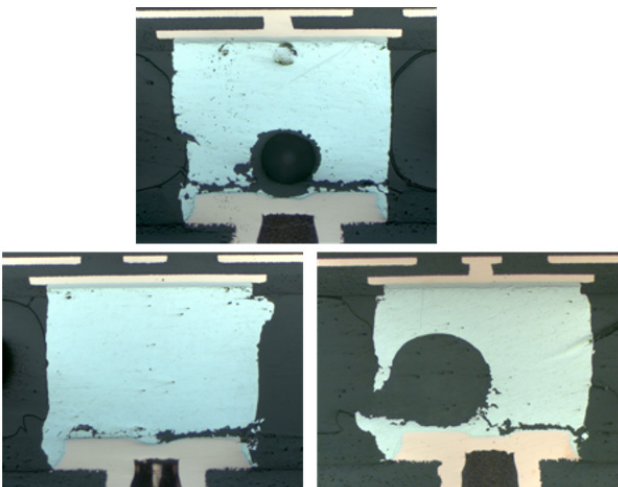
Deformed Solder Joints Found after ATC Testing with Solder Joint Encapsulant Material A
